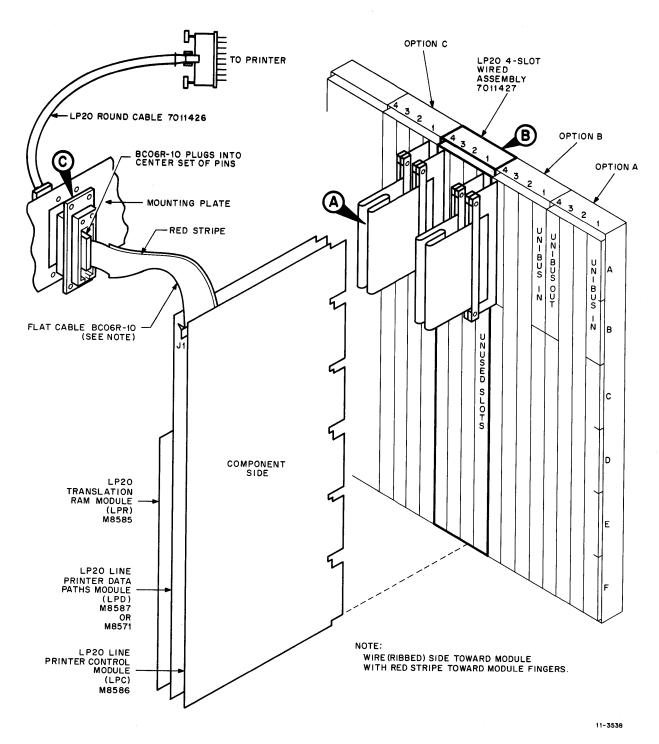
Typical LP20 Controller Assembly Mounting (Sheet 1 of 2)
